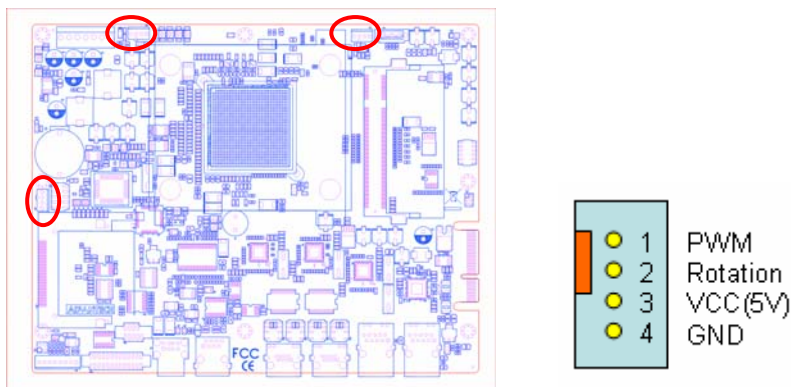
FAN Header 4Pin(CN1,CN2,CN12)
